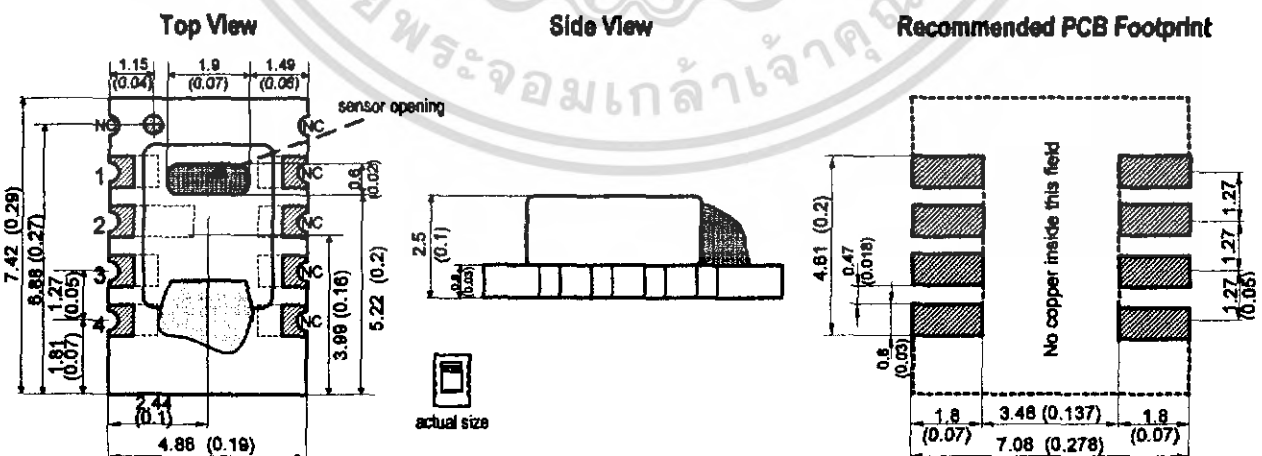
SHT1x drawing and footprint dimensions in mm (inch)
